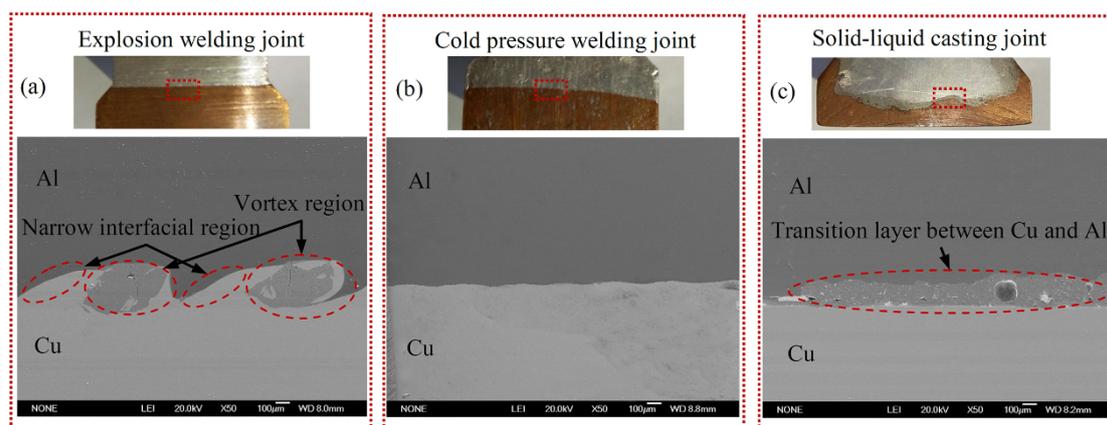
The interface macro-appearance and micro-morphologies of three kinds of interface structures, shown as: (a) explosion welding joint, (b) cold pressure welding joint and (c) solid-liquid casting joint.
